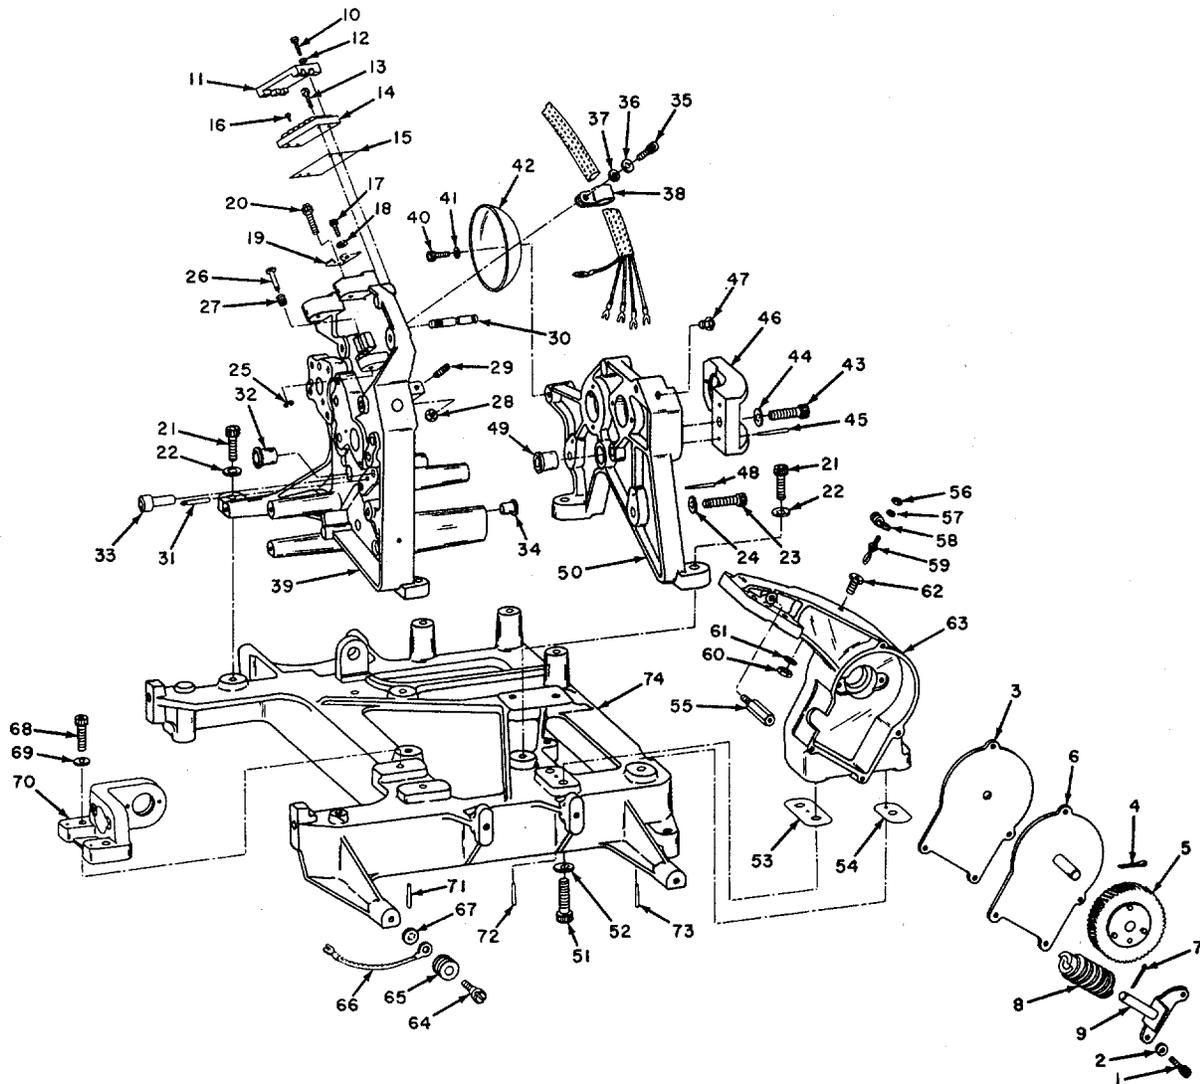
Reperforator frame assembly, exploded view (TT-76/GGC).
